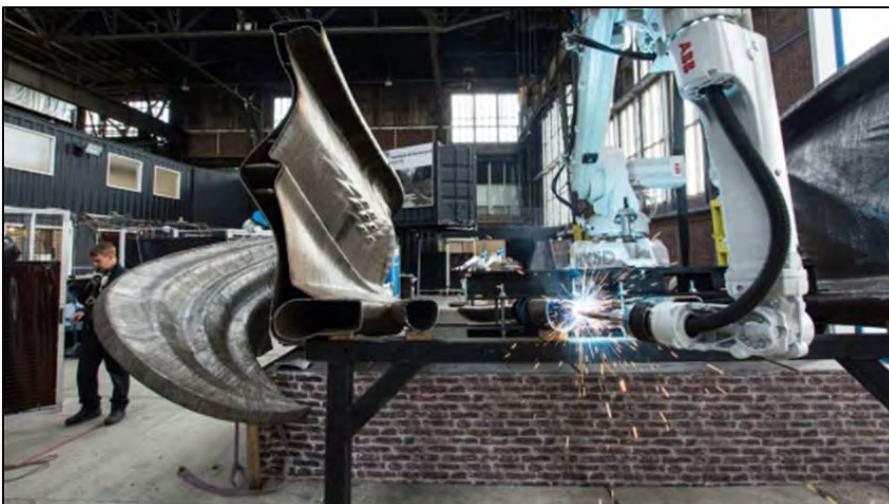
Welding robot in action during 3-D printing of bridge. MX3D project, Amsterdam
